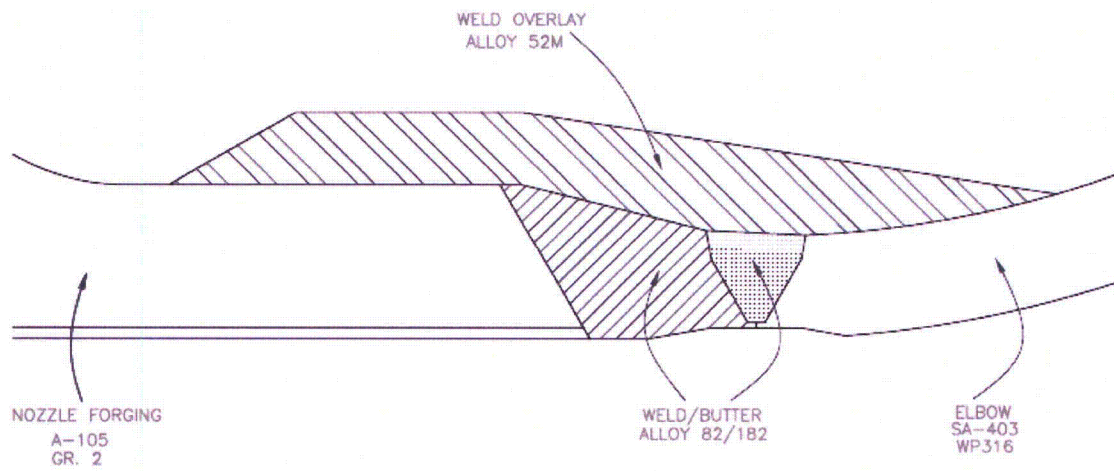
Illustration of Weld Overlay Design for Davis-Besse Hot Leg Decay Heat Nozzle
